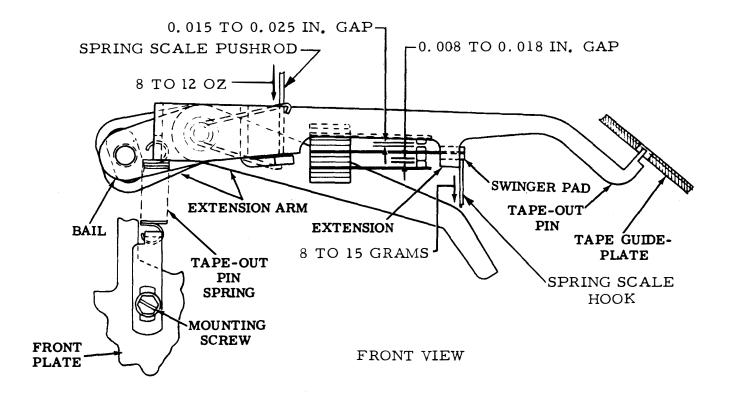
Tape-Out Contact and Tape-Out Bail Torsion Spring
